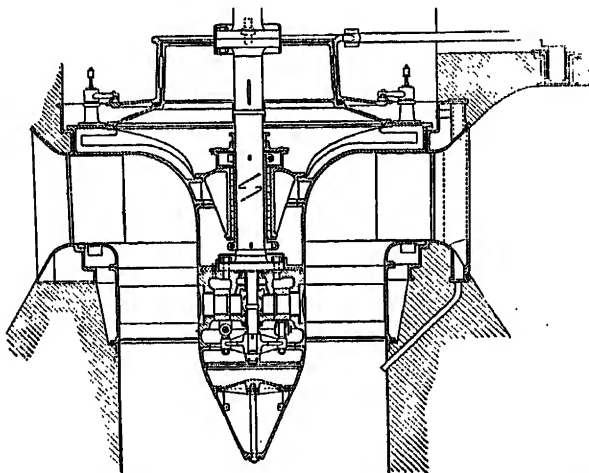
SECTIONAL ELEVATION OF A KAPLAN TURBINE
